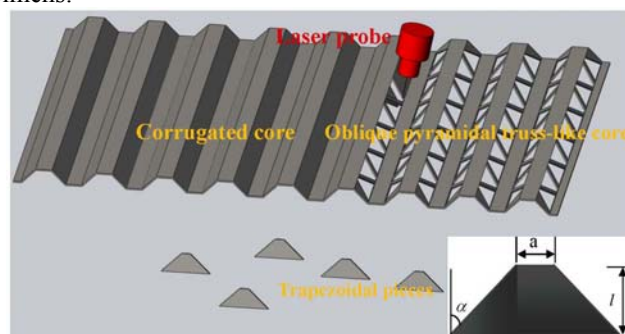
Schematic of the manufacturing process of the pyramidal truss-like core using laser beam cutting method, the dimensions of removed pieces are also included in the figure.
